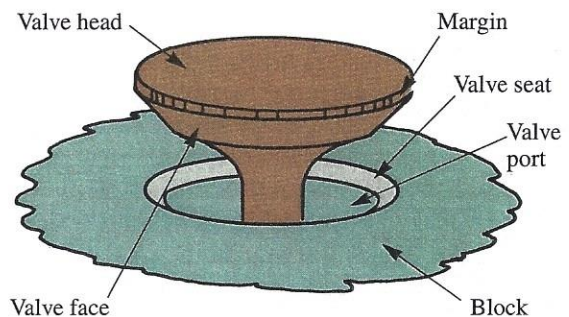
Valve face and valve seat must be ground to correct angles, and concentric to centerline of guide, to seal properly.
